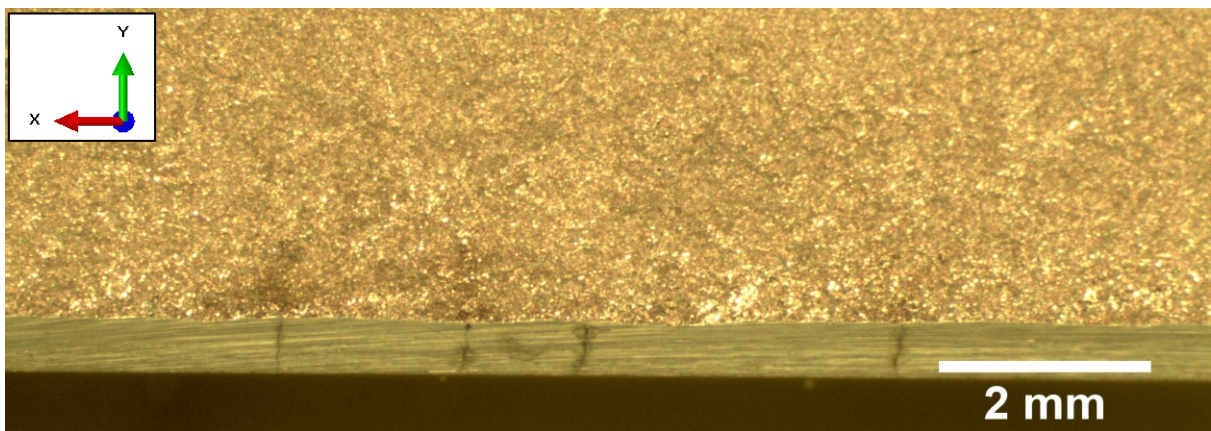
SSC cracks located on the chamfered edge of as-received specimen P14 (Specimen tested in Produced Water at 5 °C and 35 mbar H₂S). Visible grinding marks may have initiated cracking
